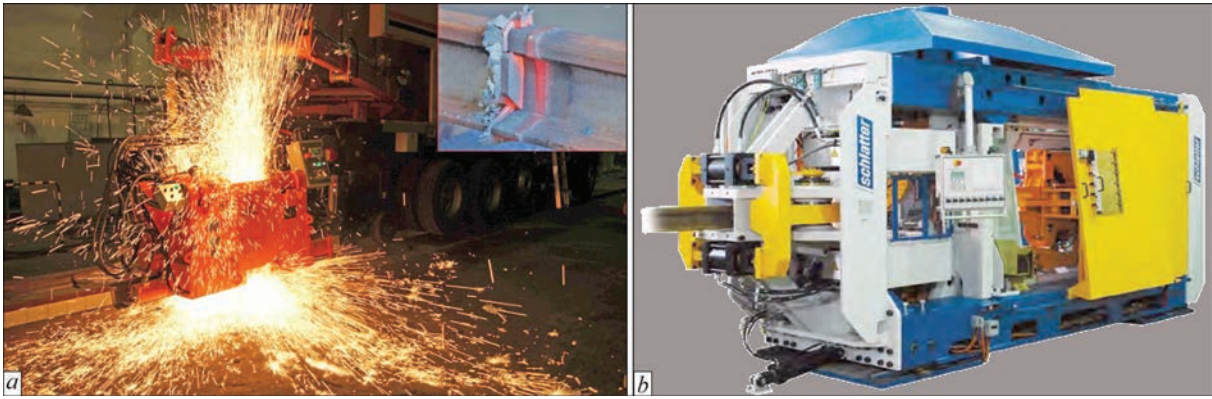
Mobile rail welding machine K922-1 during FBW with flashing (a), stationary rail welding machine Schlatter GAAS 80 (b) [35]
